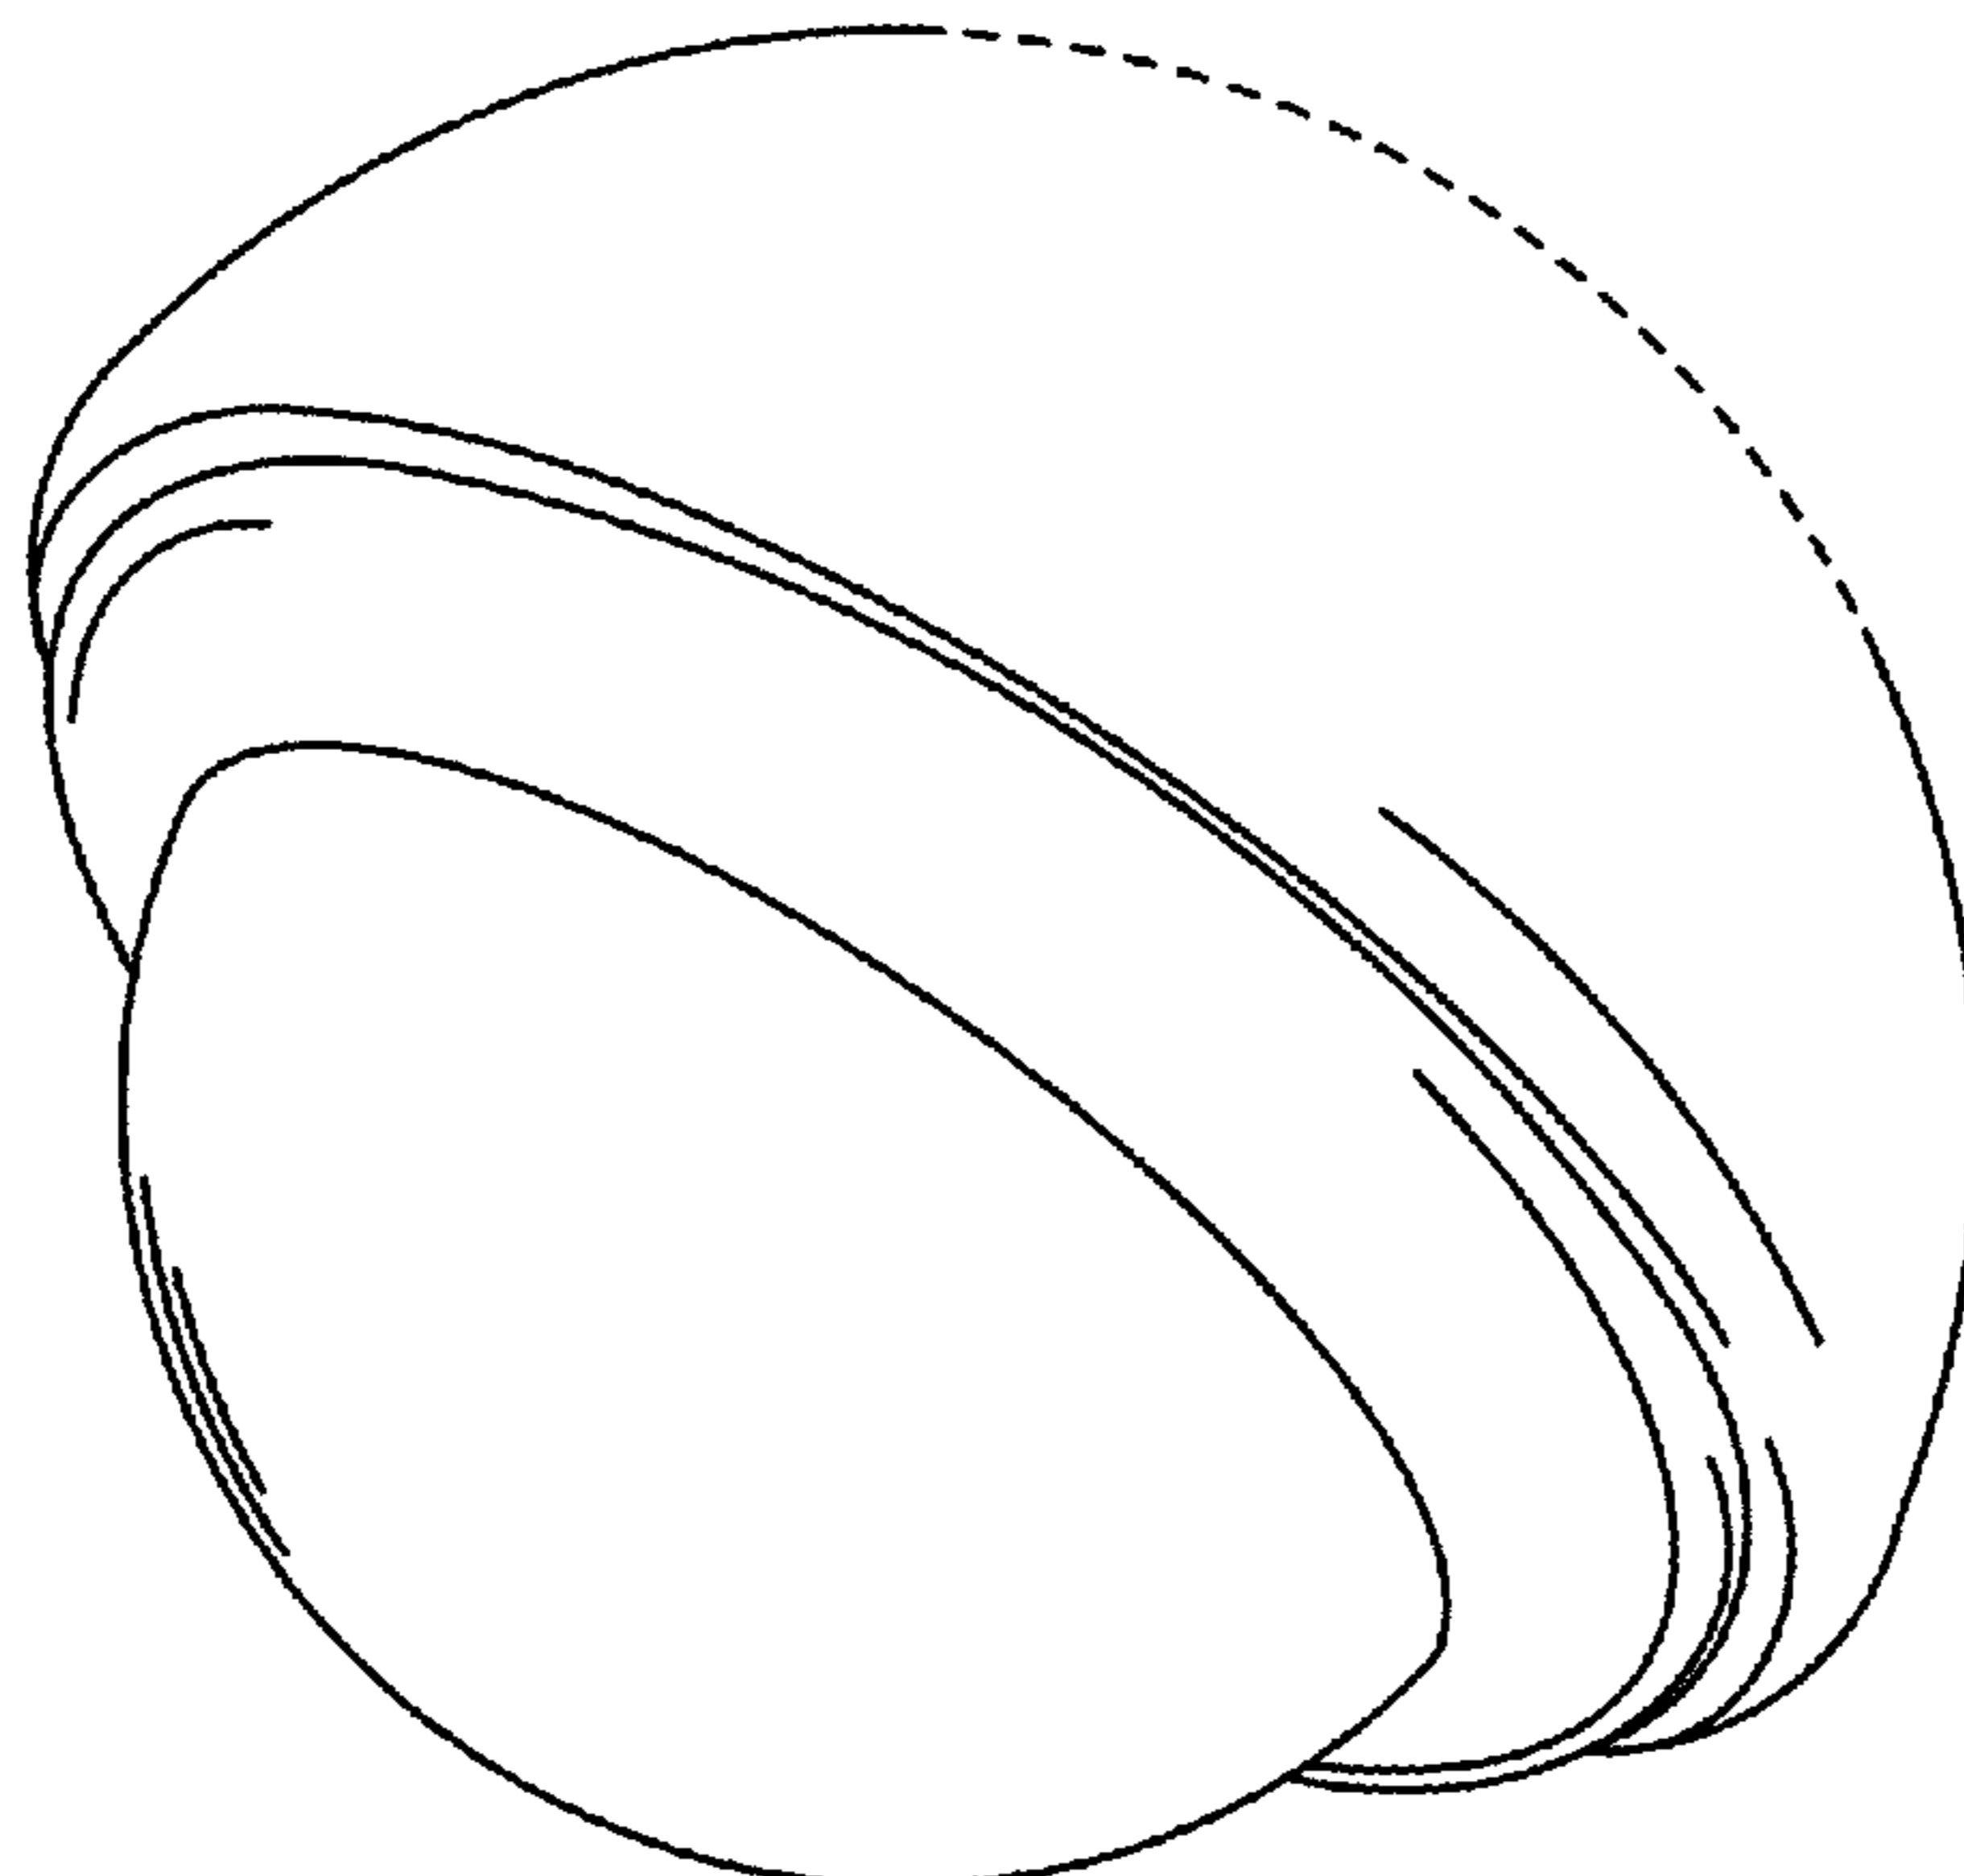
is a side perspective view of a roller therapy device having a base component, a ball, and an annular component. FIG. 2 is an exploded perspective view of the roller therapy device.
